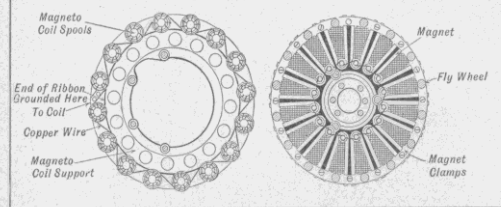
Views Showing Construction of Stationary Magneto Coil Carrying Member at Left and Rotary Magnet Carrier that Also Acts as the Motor Flywheel at Right.
